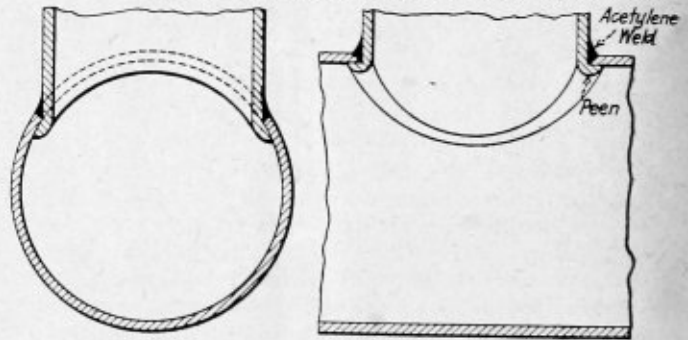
Case 332. Design for Attaching Nozzle Outlet to Pipe Headers—Not Approved
